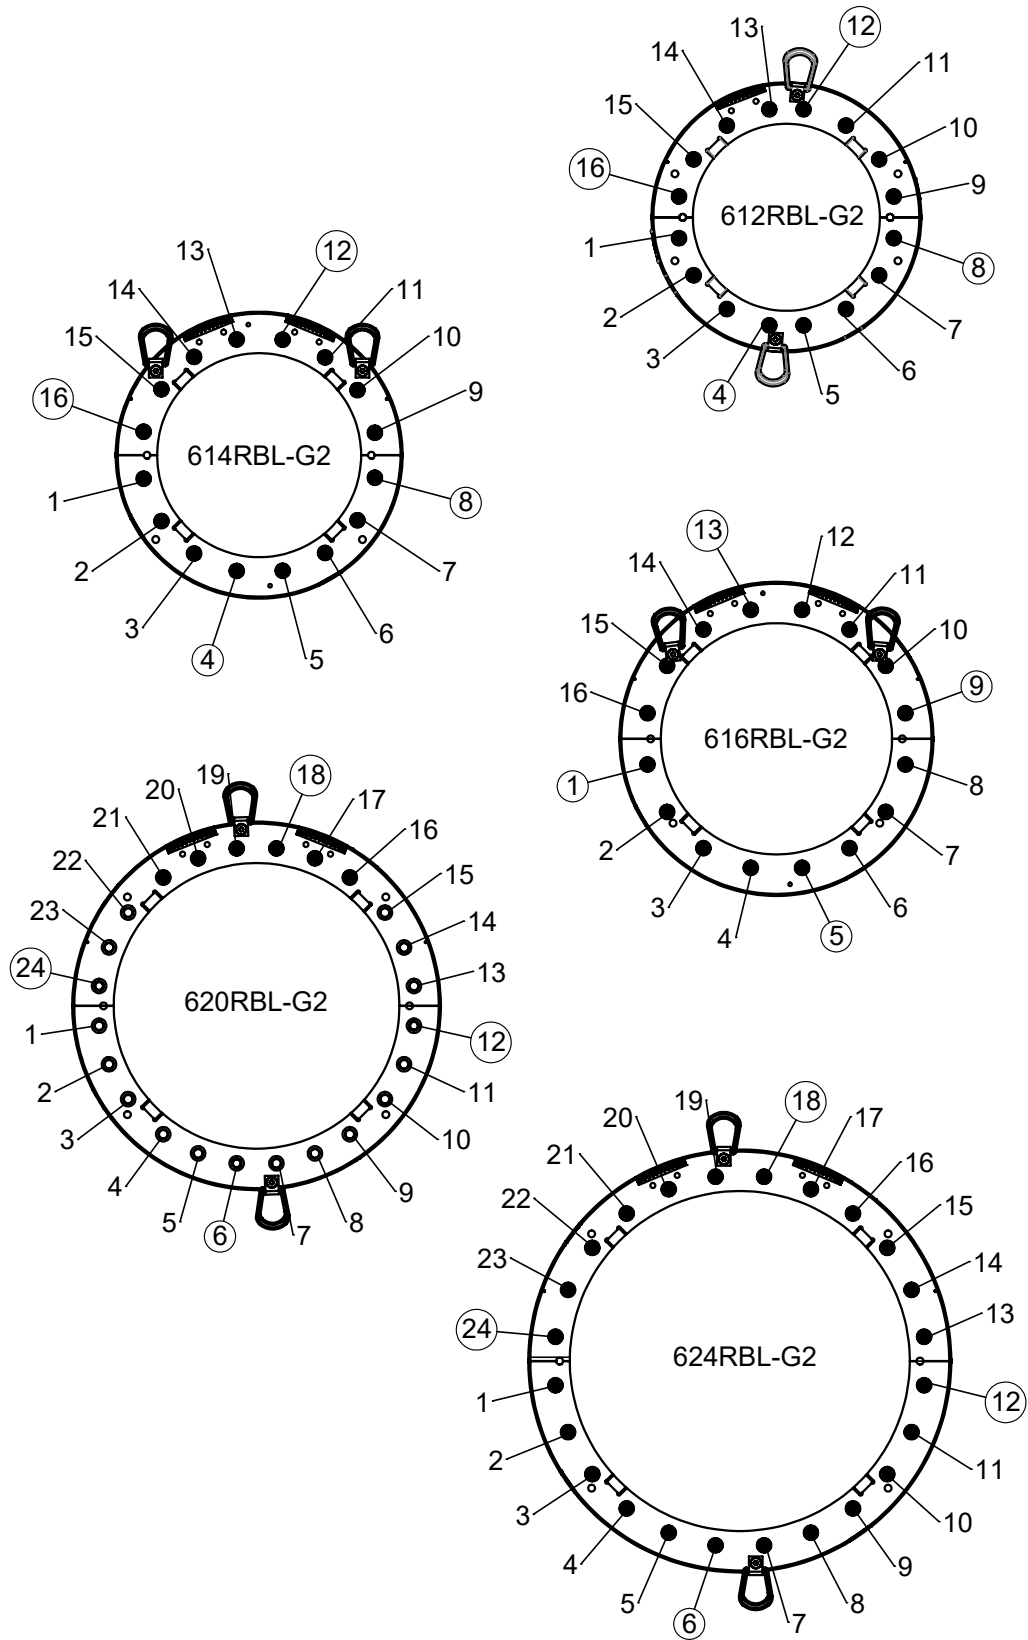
Locations of Eccentric Nuts 612-624 RBL-G2
